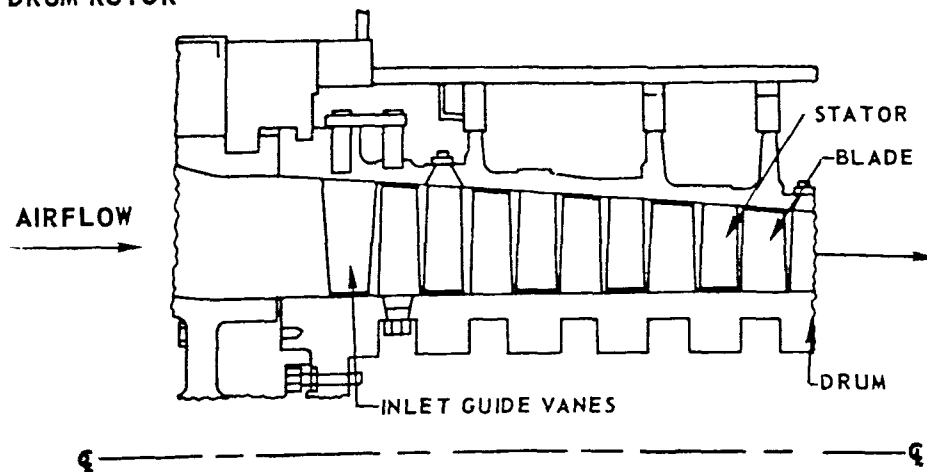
COMPRESSOR CONSTRUCTION TECHNIQUES
